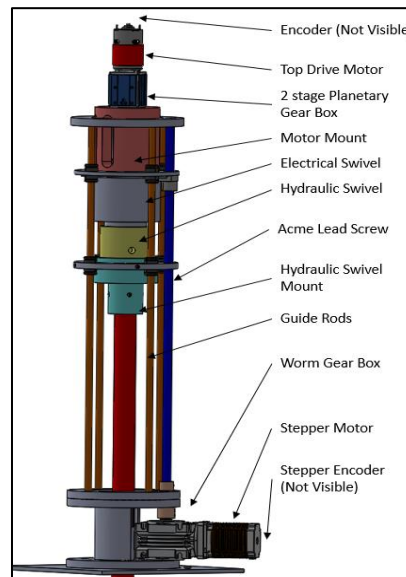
Drill system for the Tensegrity Drilling Rig. The figure shows the assembly drilling and actuation assembly inside the Tensegrity structure. The motor-planetary gearbox provides the drilling torque, while the stepper motor at the bottom of the assemble pulls the drilling assembly downwards into the formation by transmitting power to the motor mount through the acme lead screw. The guide rods help restrict motion to only the linear axis inline with the wellbore. The guide rods are supported by the Tensegrity Structure as shown in the Figure 5.1.
